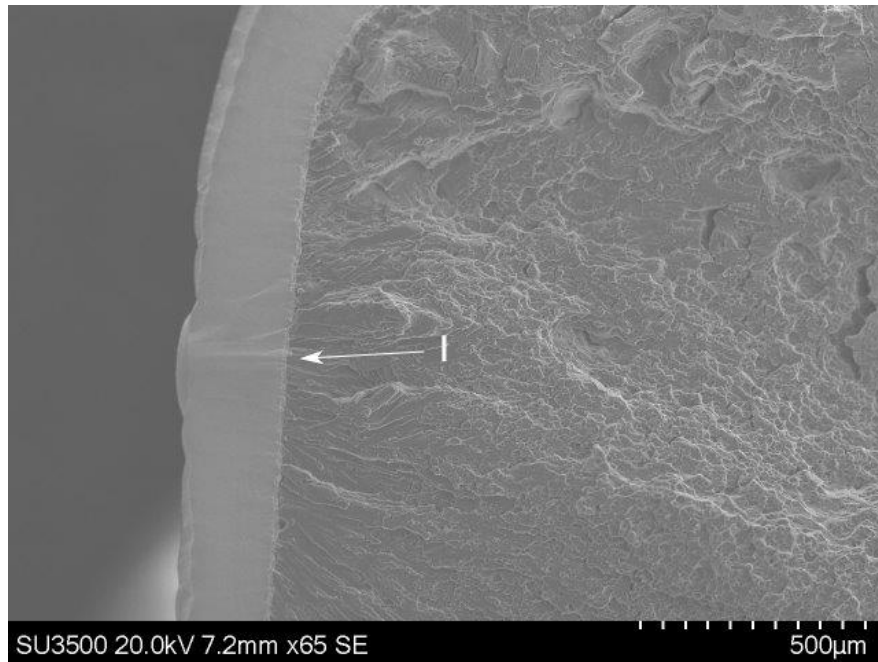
Nodule near location I on fracture surface of Specimen H13.
